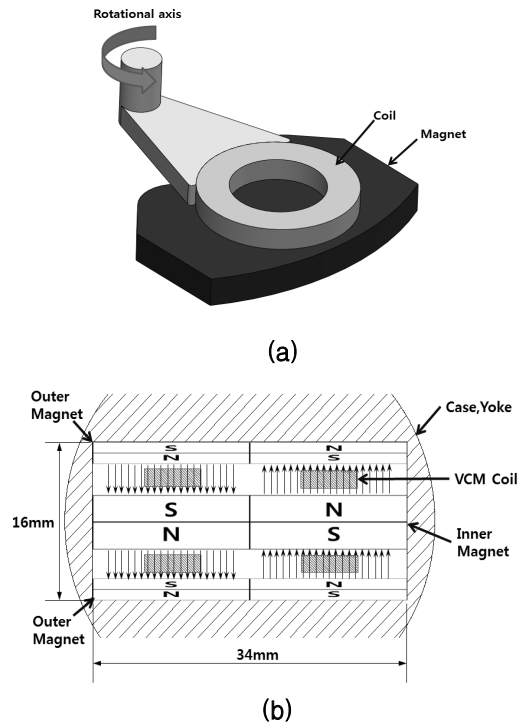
Configuration (a) and cross-section (b) of a VCM actuator
